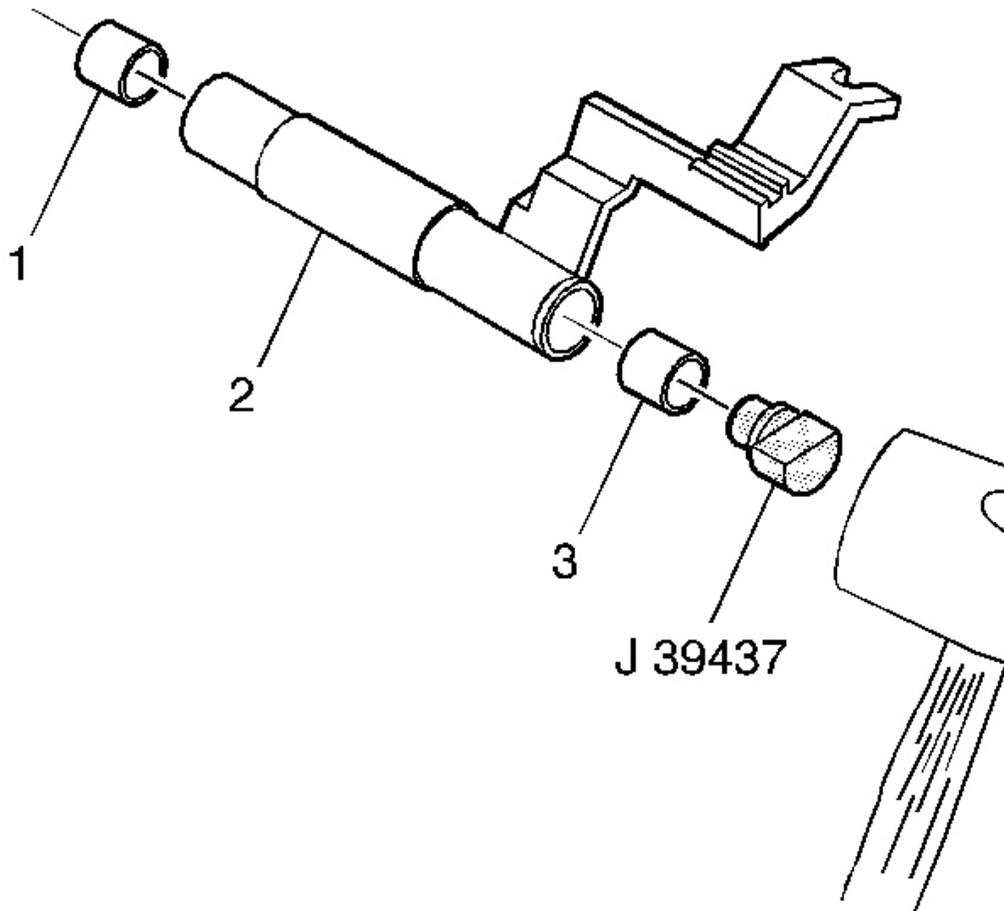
Installing 5th/6th Shift Shaft Lever Bushings On 5th/6th Shift Lever
